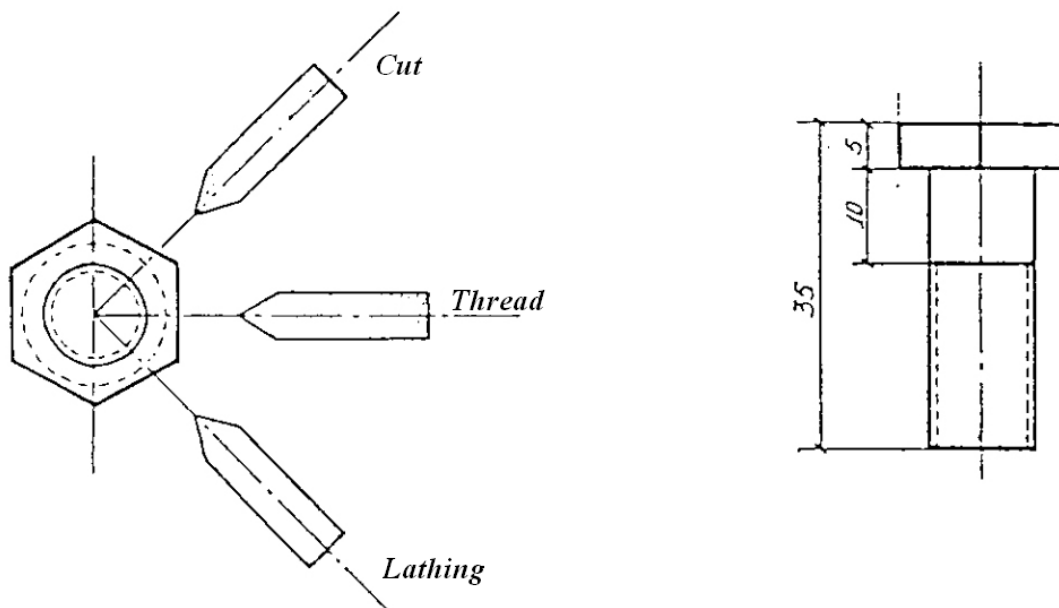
Cutting, threading and lathing tools on the left and the screw dimensions on the right
